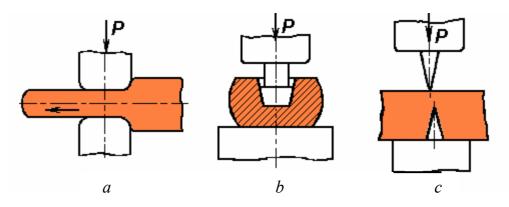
Forging operations: a - draw; b - piercing (making a hole); c - chipping (division onto parts)
